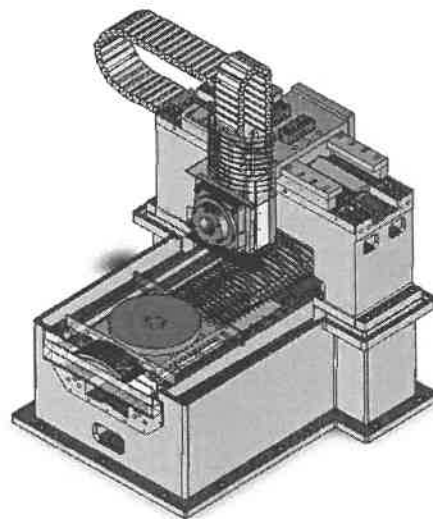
The 4-axis machine tool which is adopting hydrostatic bearings.
